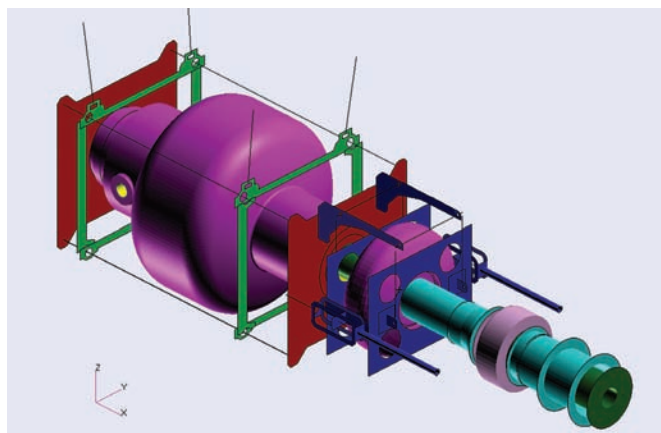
A CAD drawing of a crab cavity. (KEK and MHI Ltd.)
